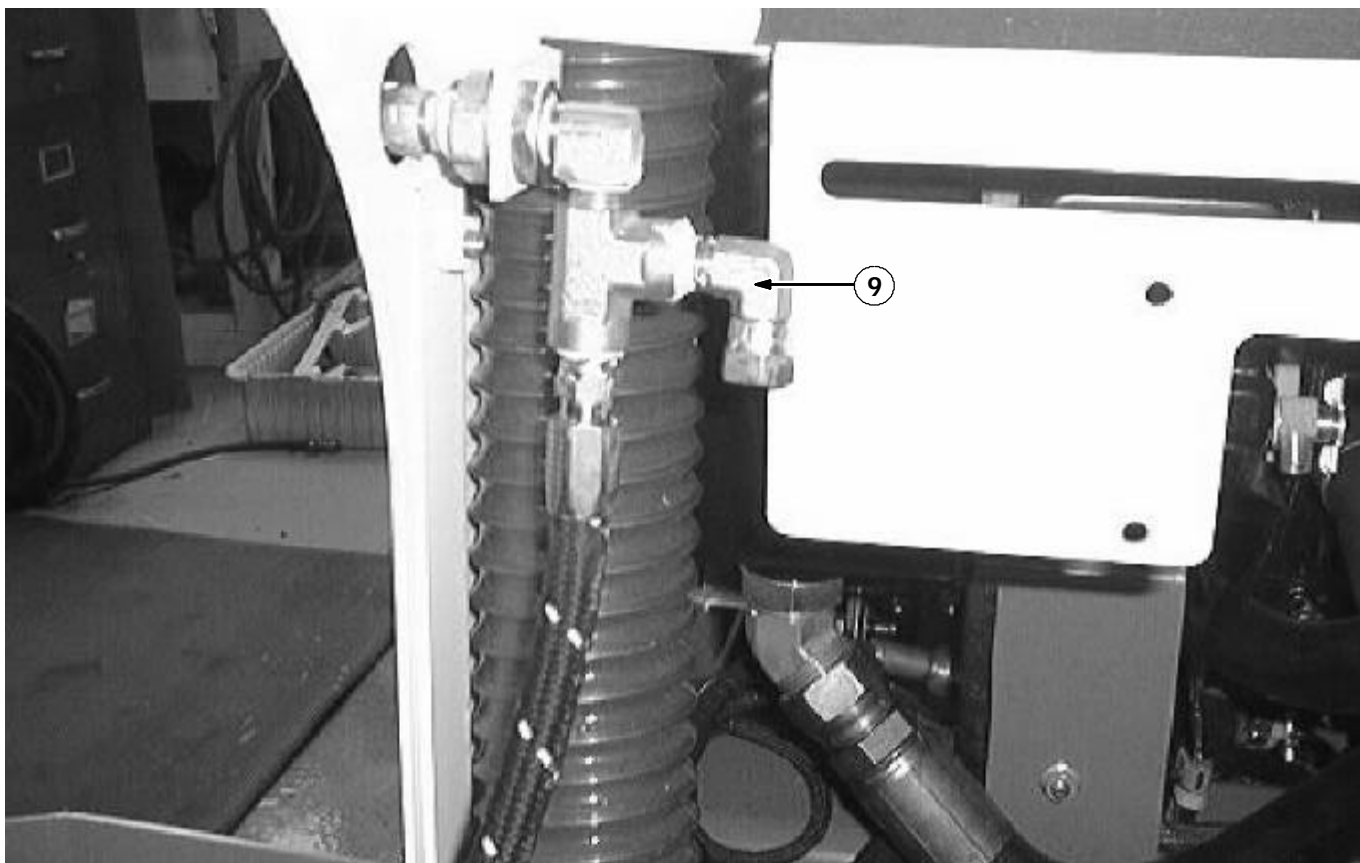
NEW PRESS RELIEF VALVE ASSEMBLY INSTALLATION
